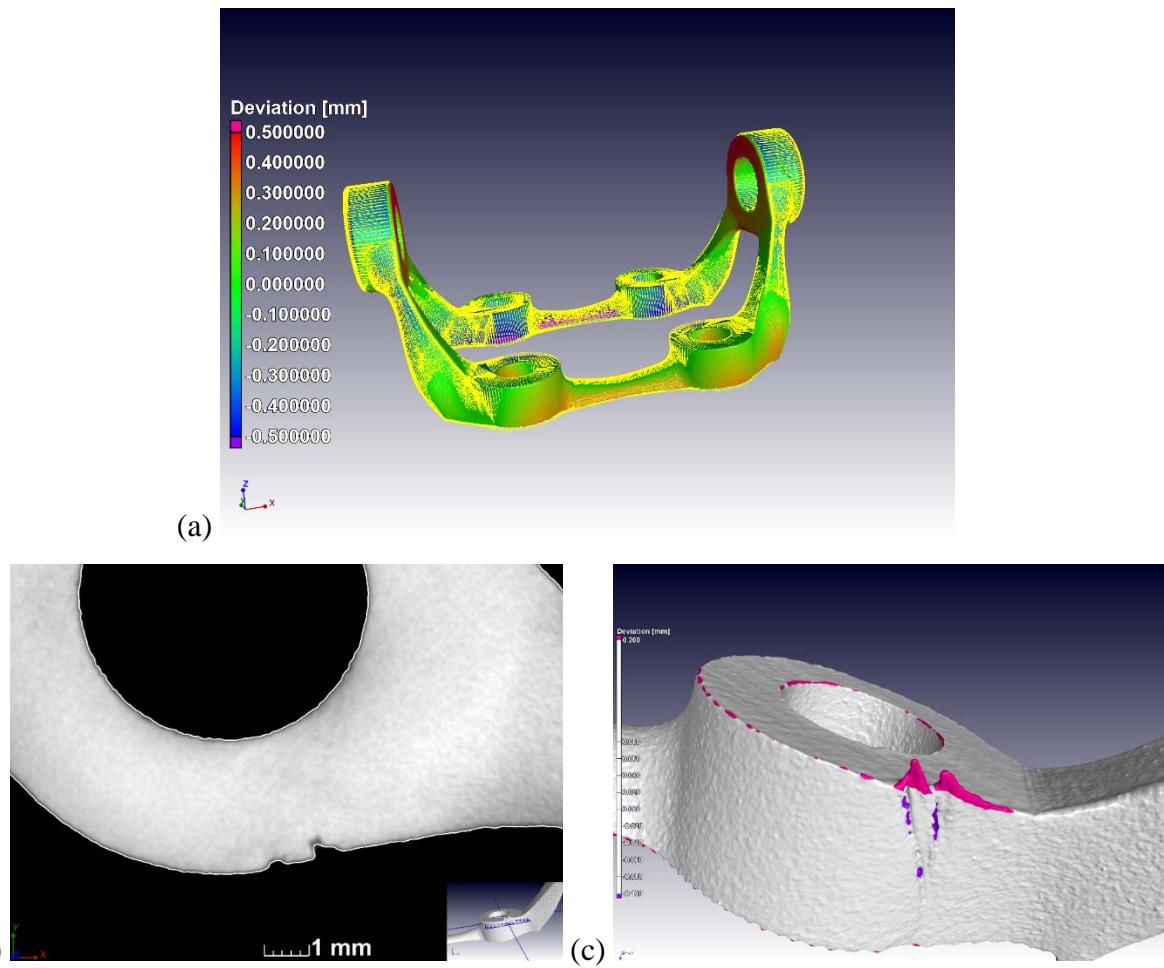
CAD variance analysis shows some warping (a) and surface defects - shown in slice image (b) and in 3D using colour coding (c) on sharp edges and notches.
